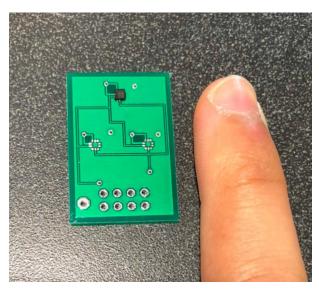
The bottom layer of the PCB with LPS22HB mounted on board
